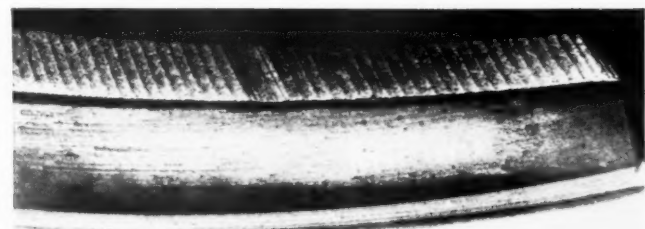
Satisfactory ring gear tooth surface — High Speed Axle Test.
